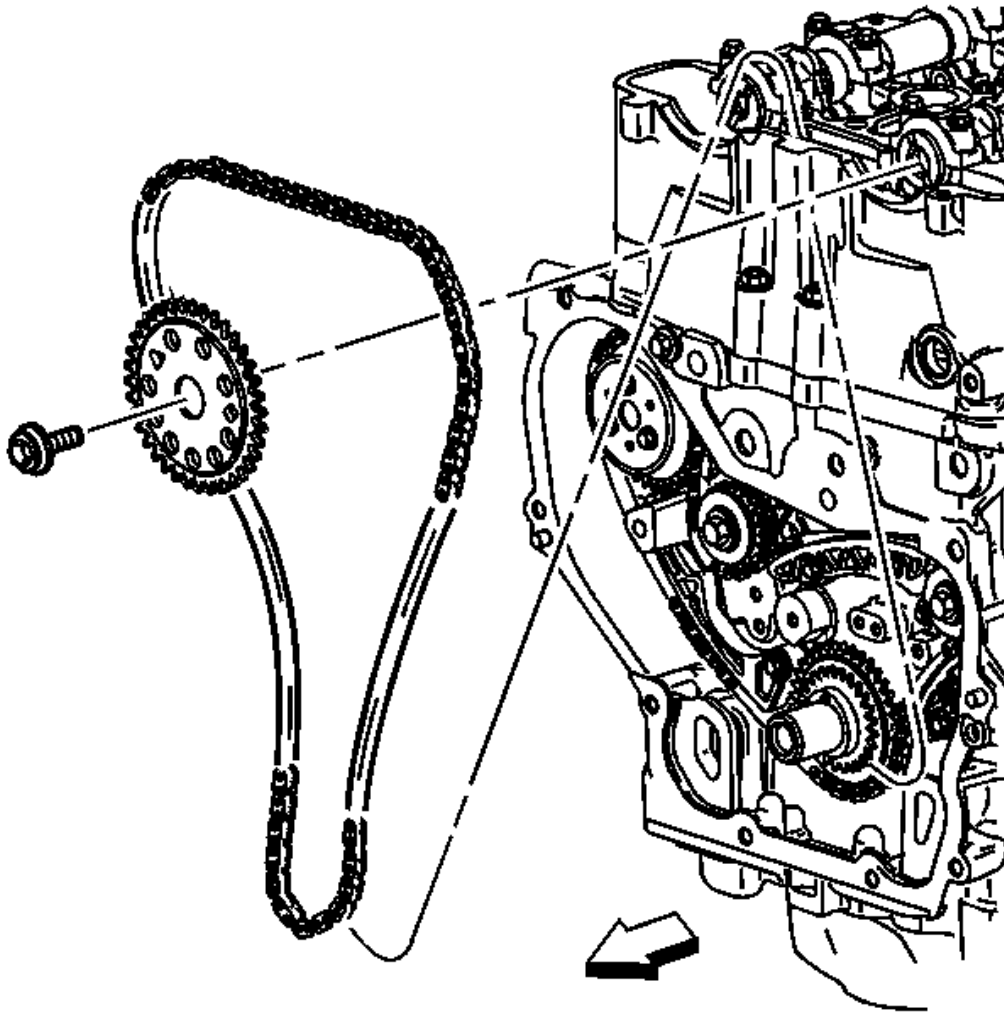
View Of Intake Camshaft Sprocket And Chain
